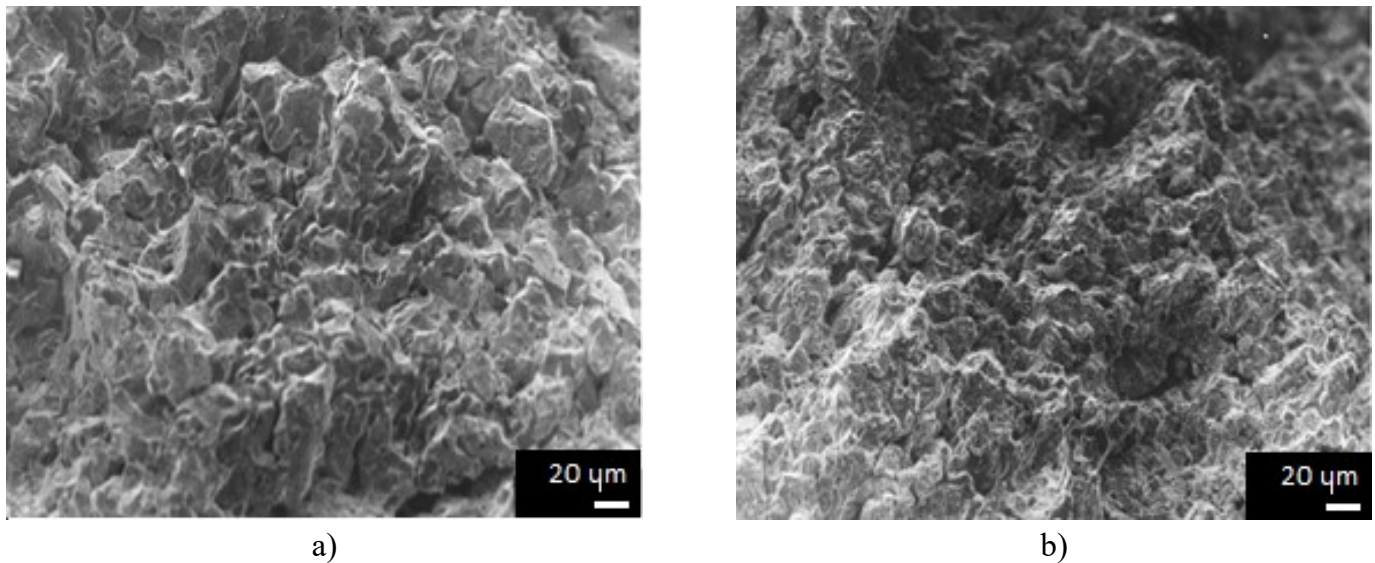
Fractography of Fe-3% Mn-0.8% C; a) Brittle fracture of 3N\_1 sample, sintered at 1120°C, b) ductile fracture of 3N\_2 sample, sintered at 125°C [13]
